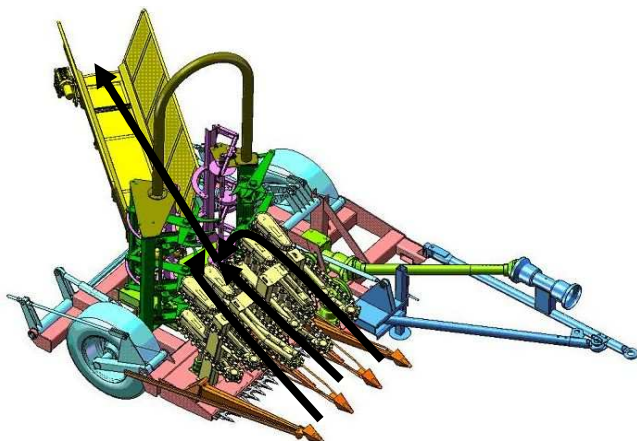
The schema of the processing executed by the sheaf-binder harvesting machine for wicker
